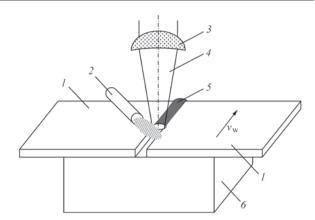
Technological scheme of laser welding process of edges of pilot specimens of cone filter elements with loose edges: *I* — welded edges; *2* — feeding of filler powder; *3* — focusing lens; *4* — laser radiation; *5* — weld; *6* — substrate (arrow shows direction of welded specimen movement)
